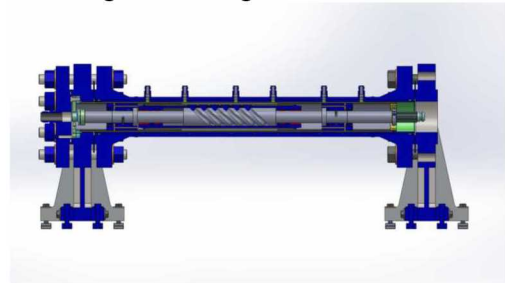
AXIAL PISTON MOTOR MODULE IN DYNAMOMETER TEST STATION PRESSURE VESSEL / TEST CHAMBER.
